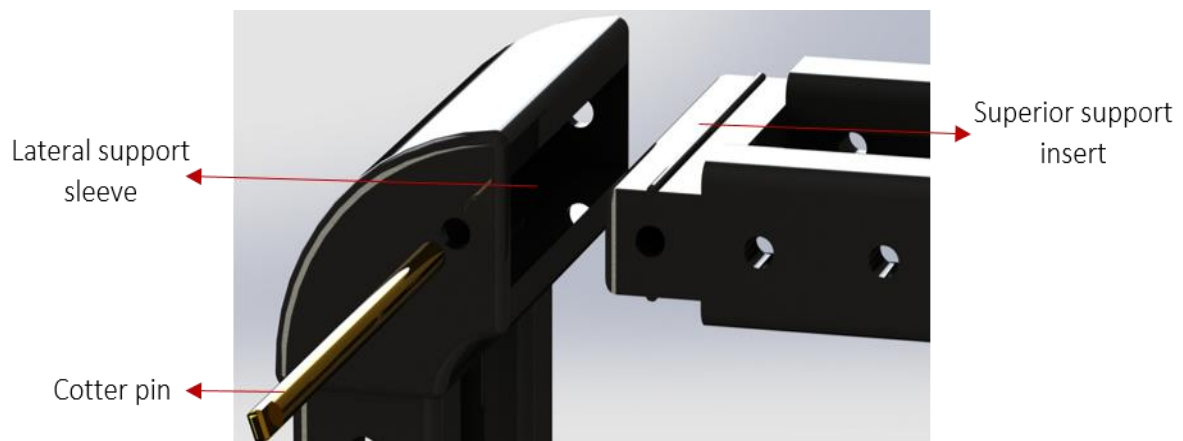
Sleeve and cotter type joint allowing for LAS support structure ease of assembly and disassembly.
